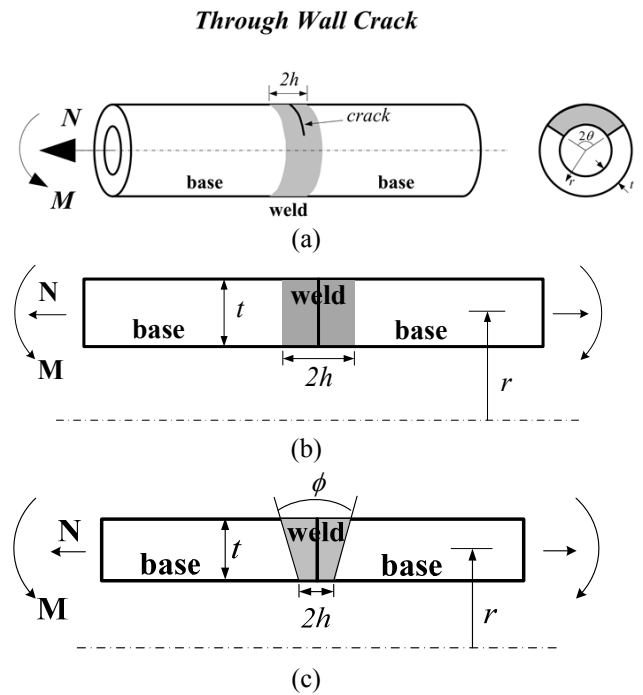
Schematic illustrations of circumferential cracked pipes under tension N and bending M , considered in the present work; (a) welded pipe (b) idealized welds (c) V-groove welds
